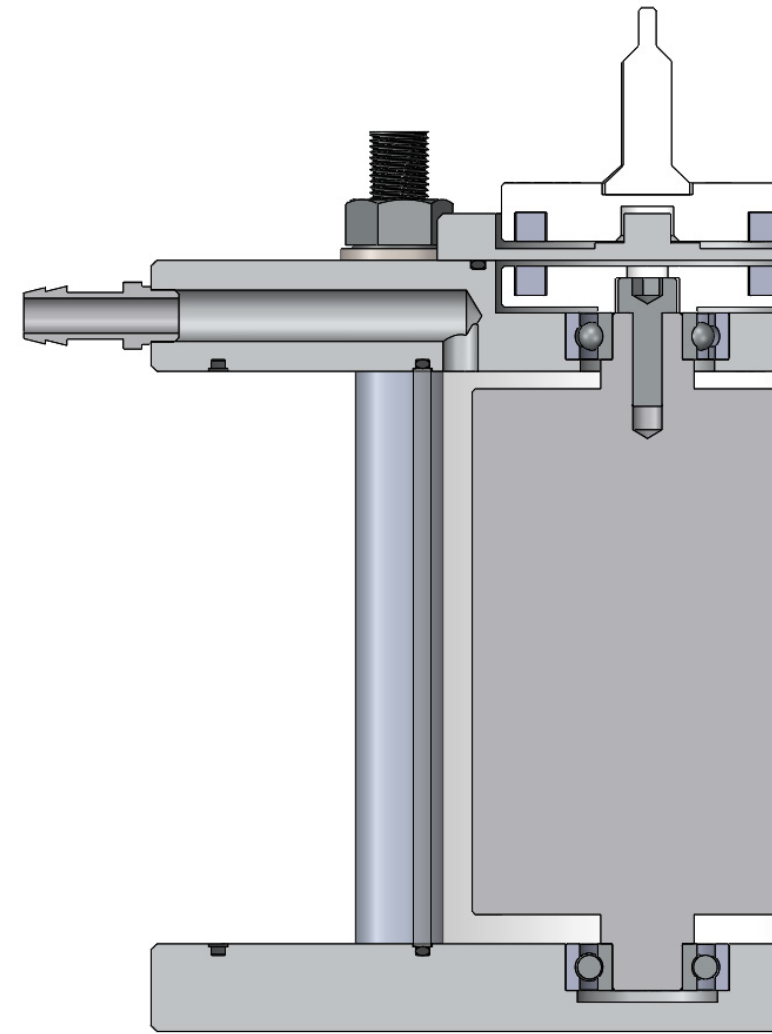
Cutaway of the 3D prototype model, with the slender rotor
